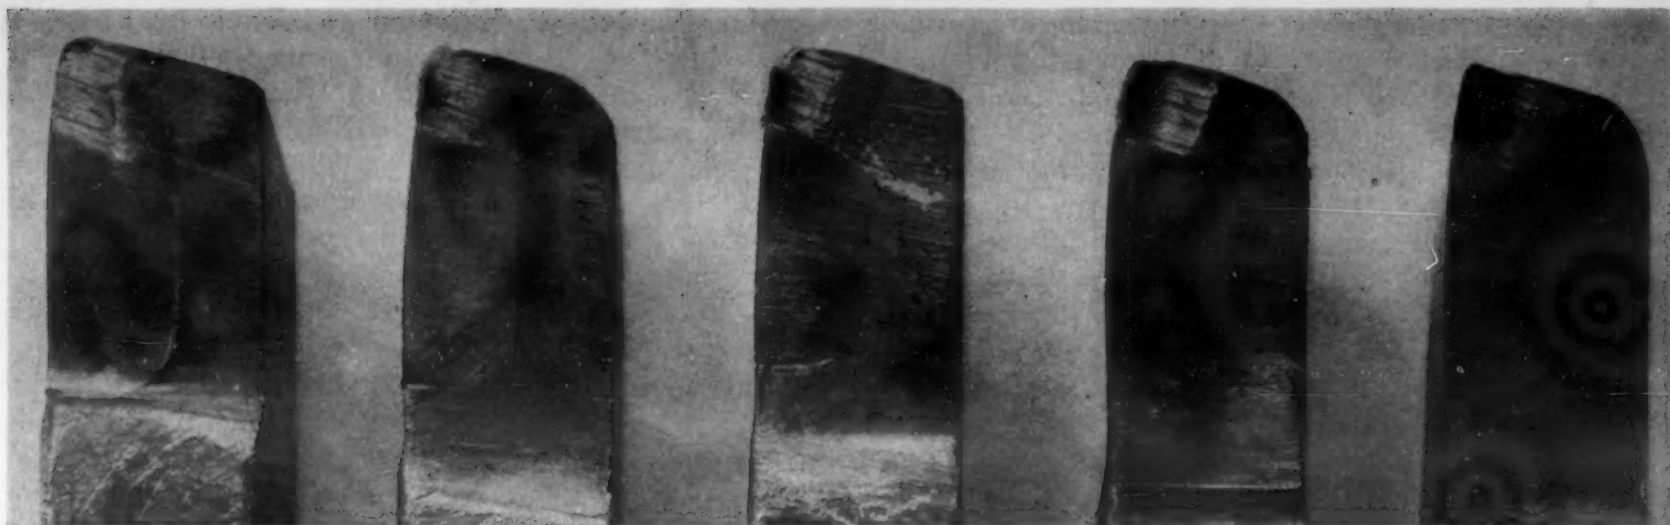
Cemented Tungsten Carbide Lathe Tools Used in Break Down Test. All Tools Failed Except Tool Shown on Extreme Left. Note the Depressions Worn on Top Surface of the Tools during Test and the Similarity of Wear to the High Speed Steels Shown in Fig. 2
